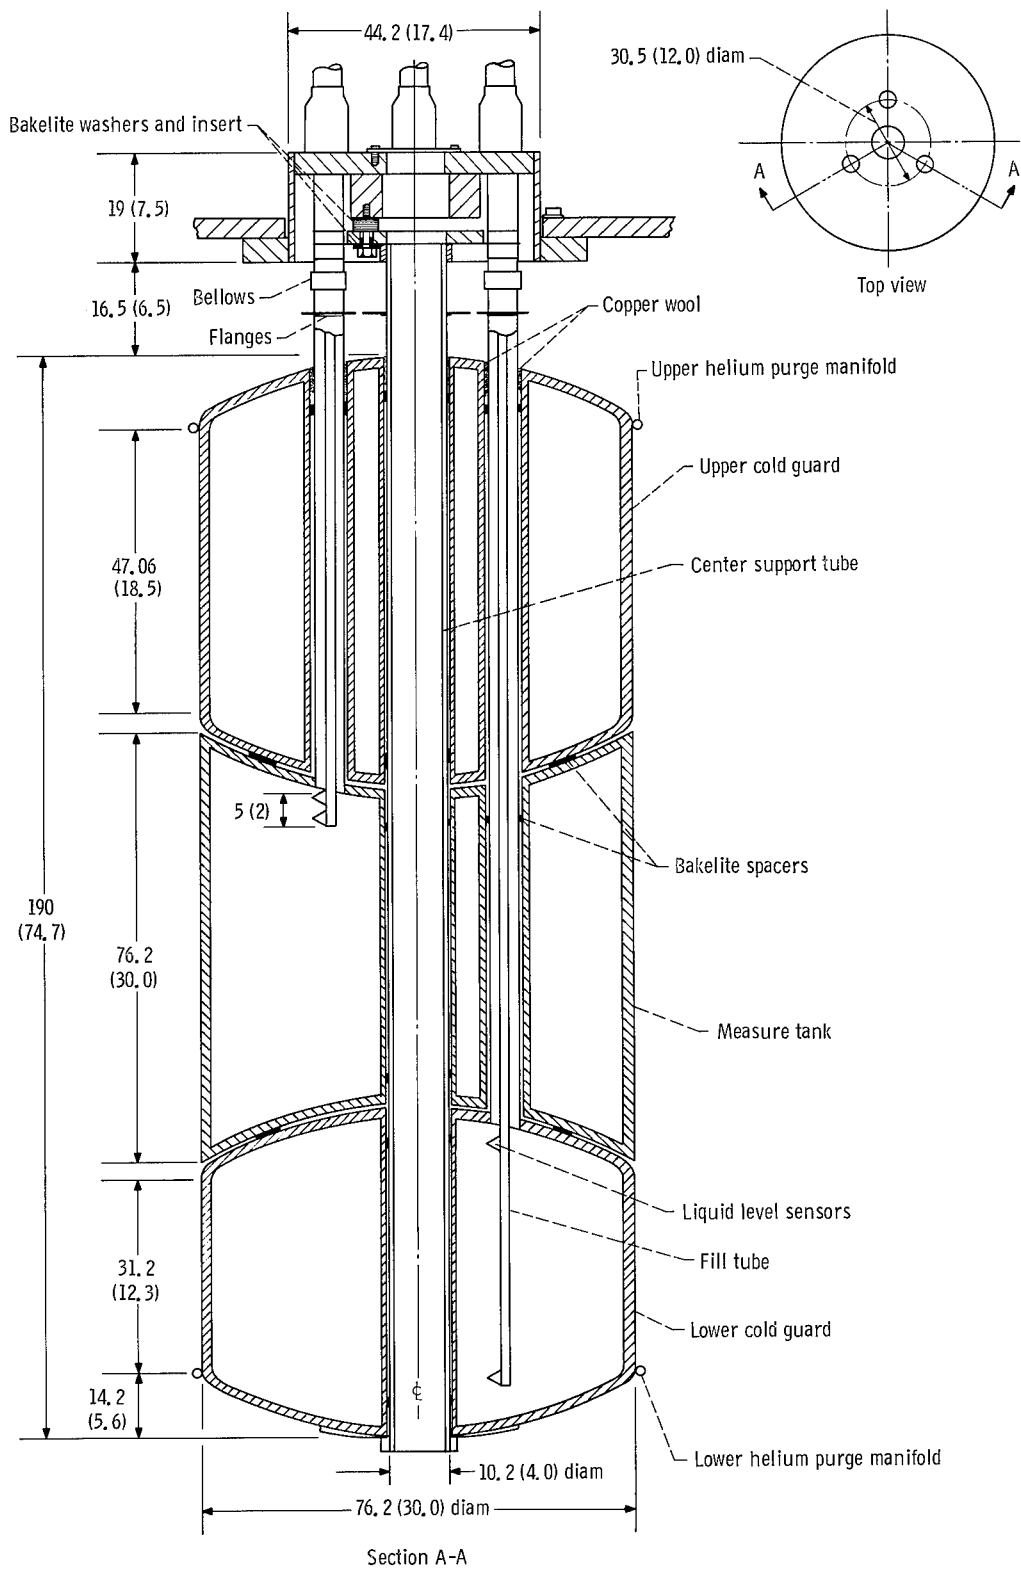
Double-guarded cylindrical calorimeter. Dimensions are in centimeters (in.).
